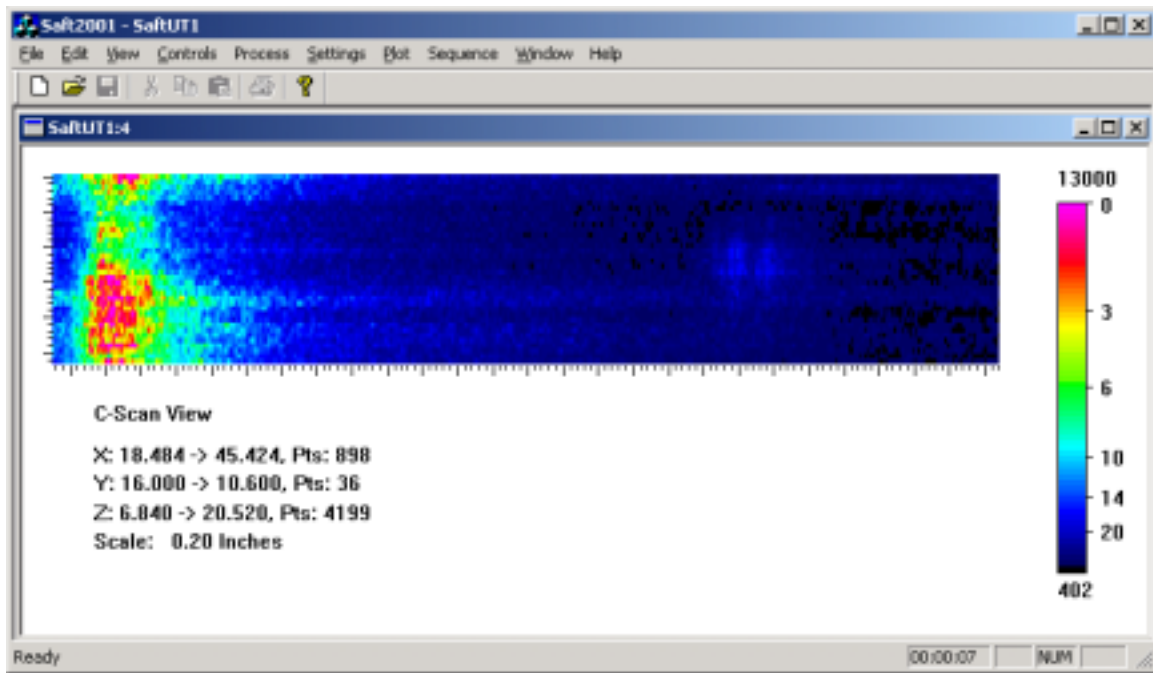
C-Scan or plan view of a P. E. image showing the second knuckle weld on the left and a ten percent through-wall deep notch 483 mm (19 in.) beyond the weld.
